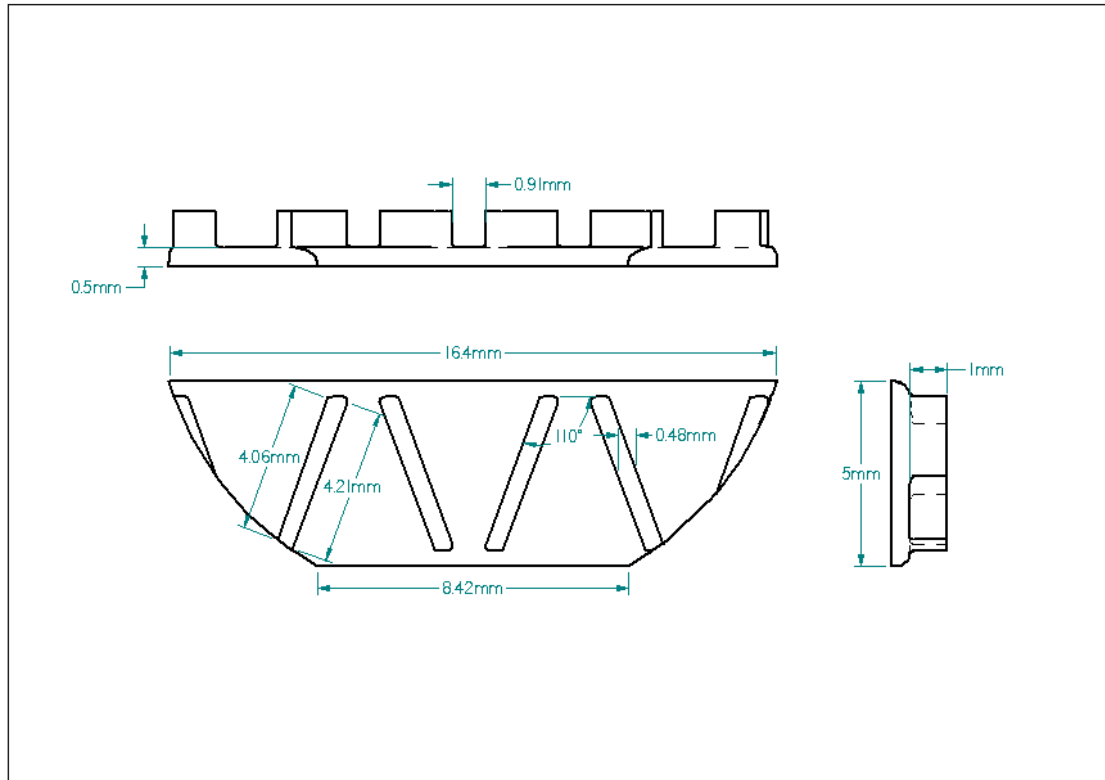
CAD drawing of the R05S vortex generator design
